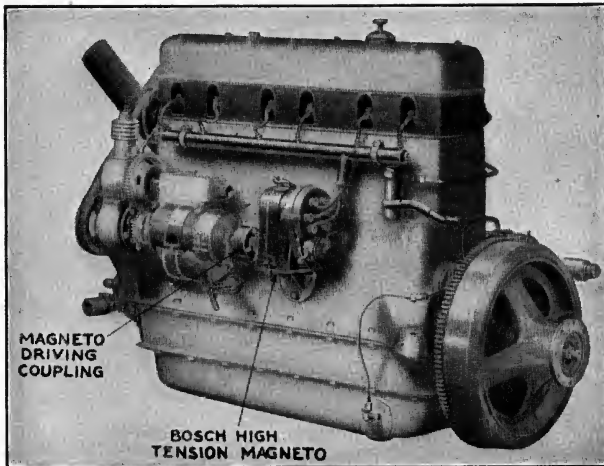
Bosch high-tension magneto installation on 1918 Marmon engine.
